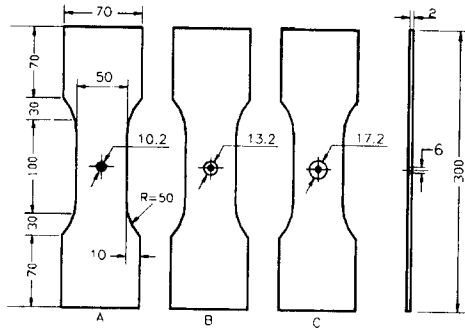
Shape and dimensions of the fatigue test specimens (unit : mm)
